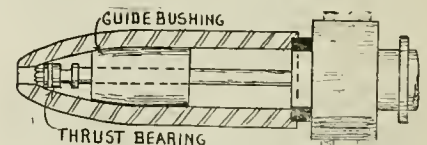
ARRANGEMENT OF ROUGHING CUTTER BAR FOR RECESSING BASE.
